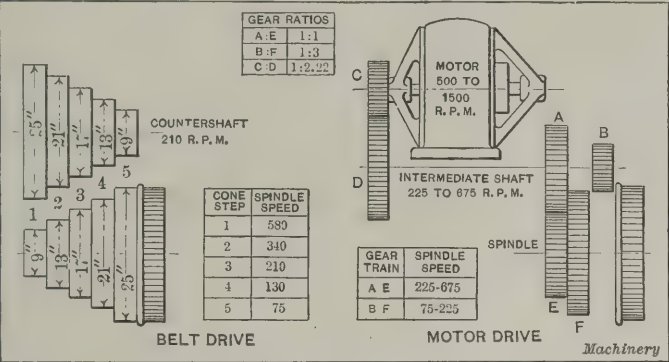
Comparison of Belt and Motor Drive of Engine Lathes
